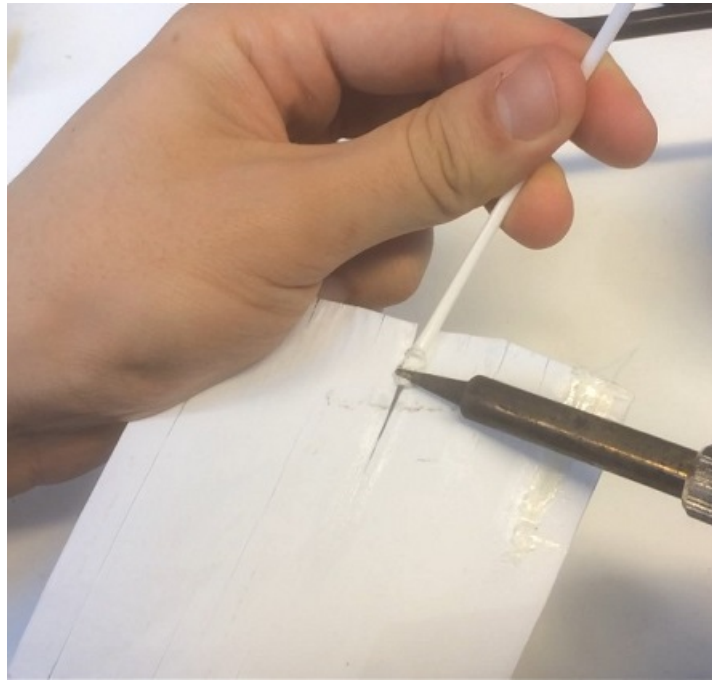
Repairing a large crack with a soldering machine(2)
